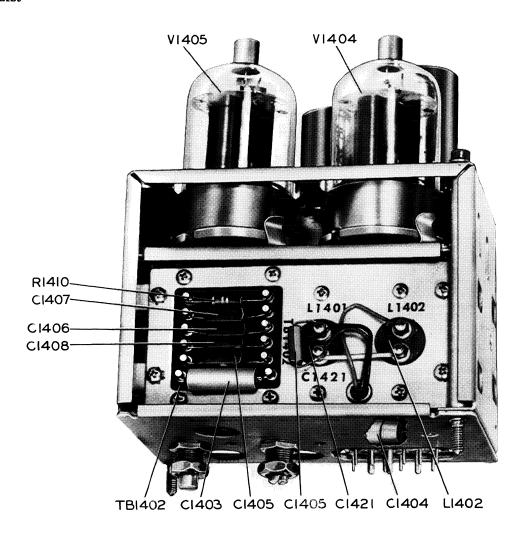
Transceiver 618S-1, Modulator, Rear View
